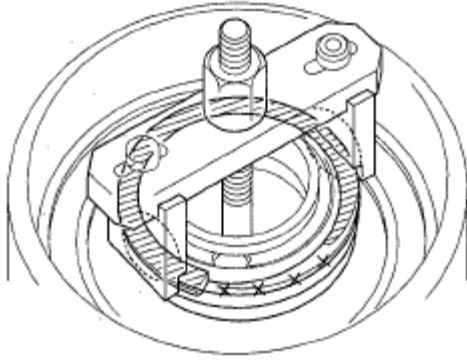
Identifying Clutch Spring Compressor Attachment Position
